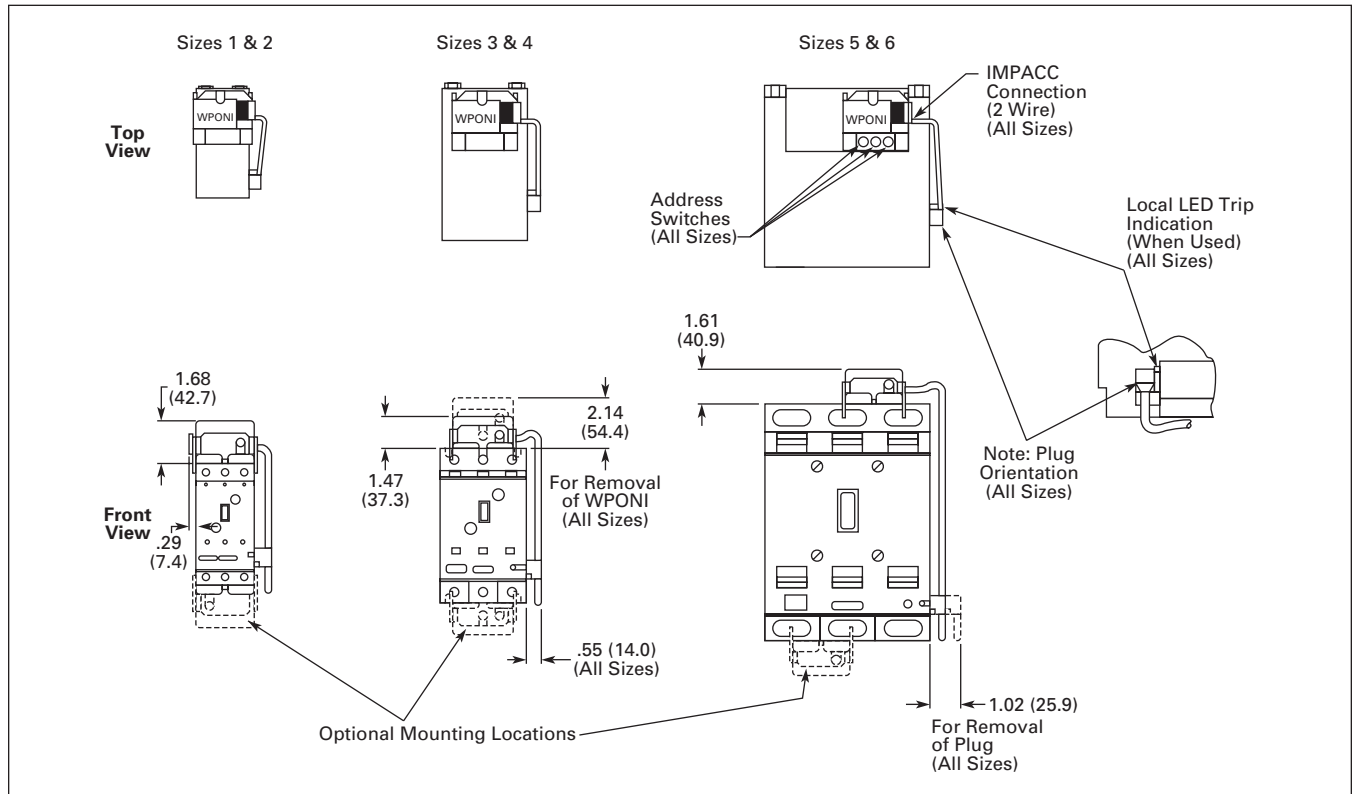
Mounting Procedures — WPONI — Approximate Dimensions in Inches (mm)
